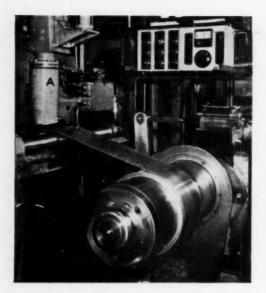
Close-up View Showing Part of the Measuring Head and the Indicator Panel
